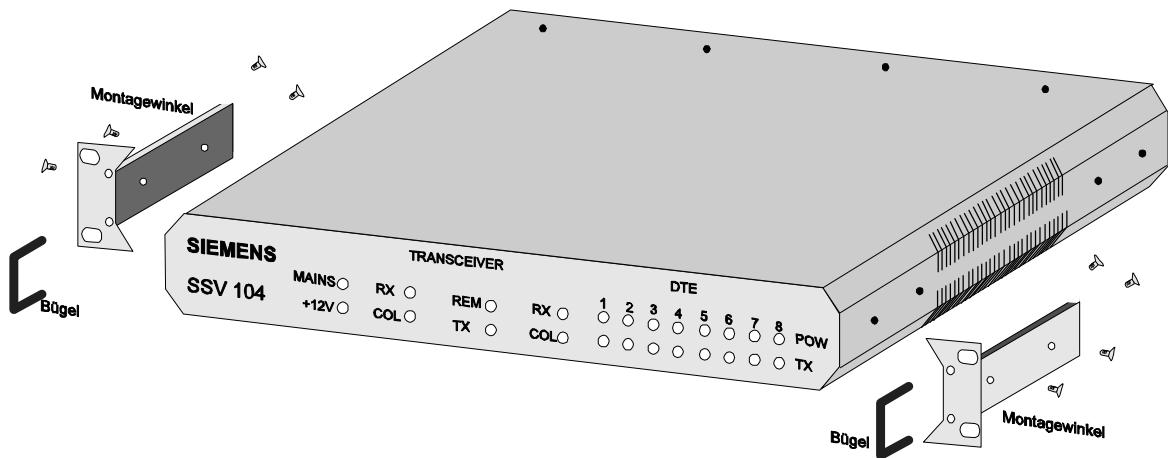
Assembly of the SINEC Fan-Out Unit SSV 104, Front View
